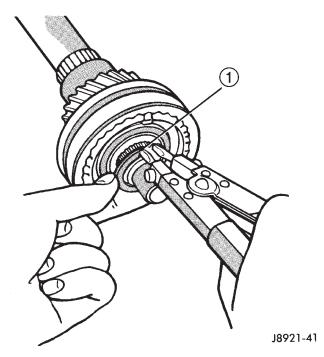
Remove 3–4 Synchronizer Snap Ring
